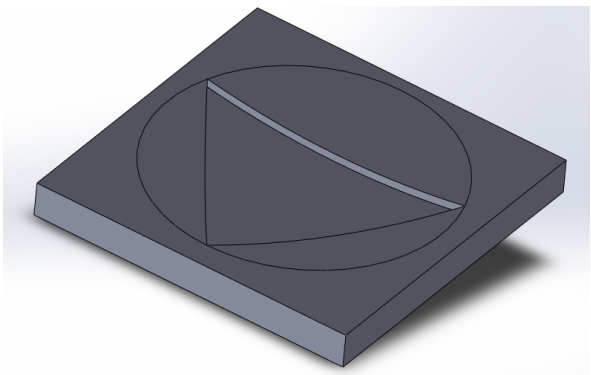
Mold 3D designs generated using SOLIDWORKS
